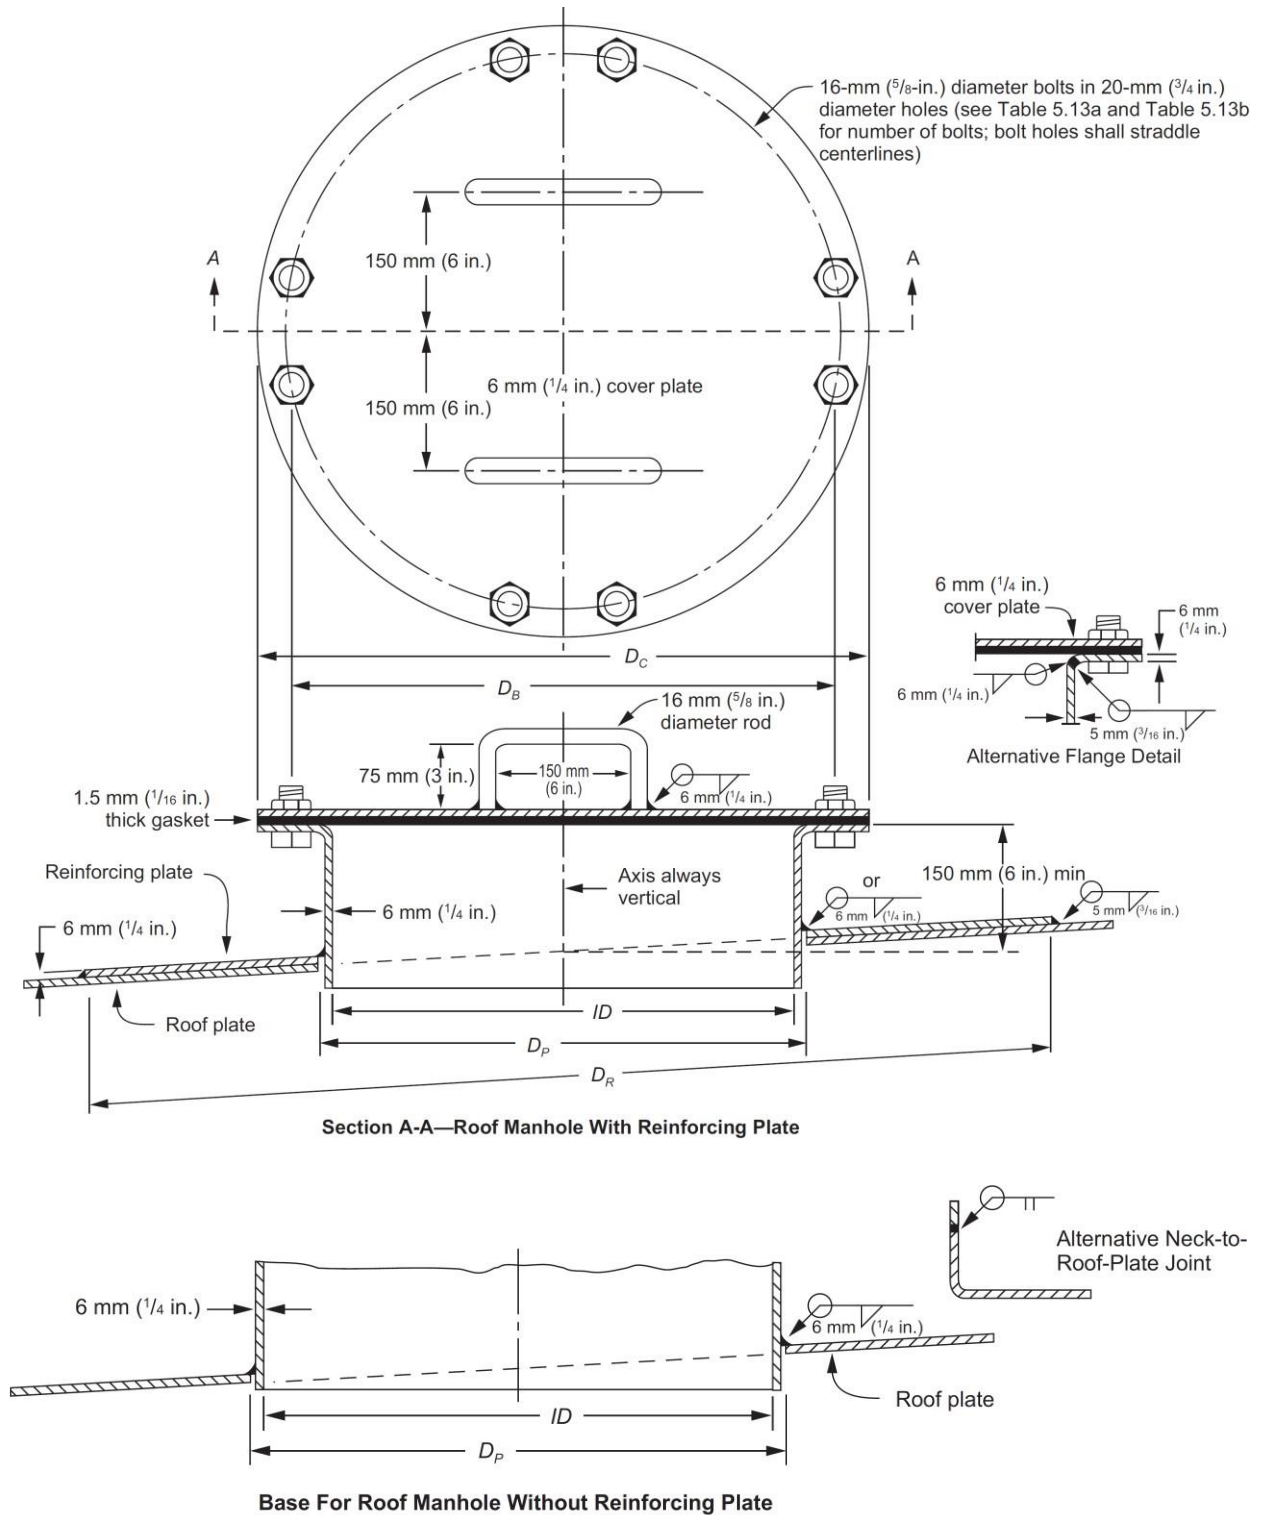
Roof Manholes (see Table 5.13a and Table 5.13b)
